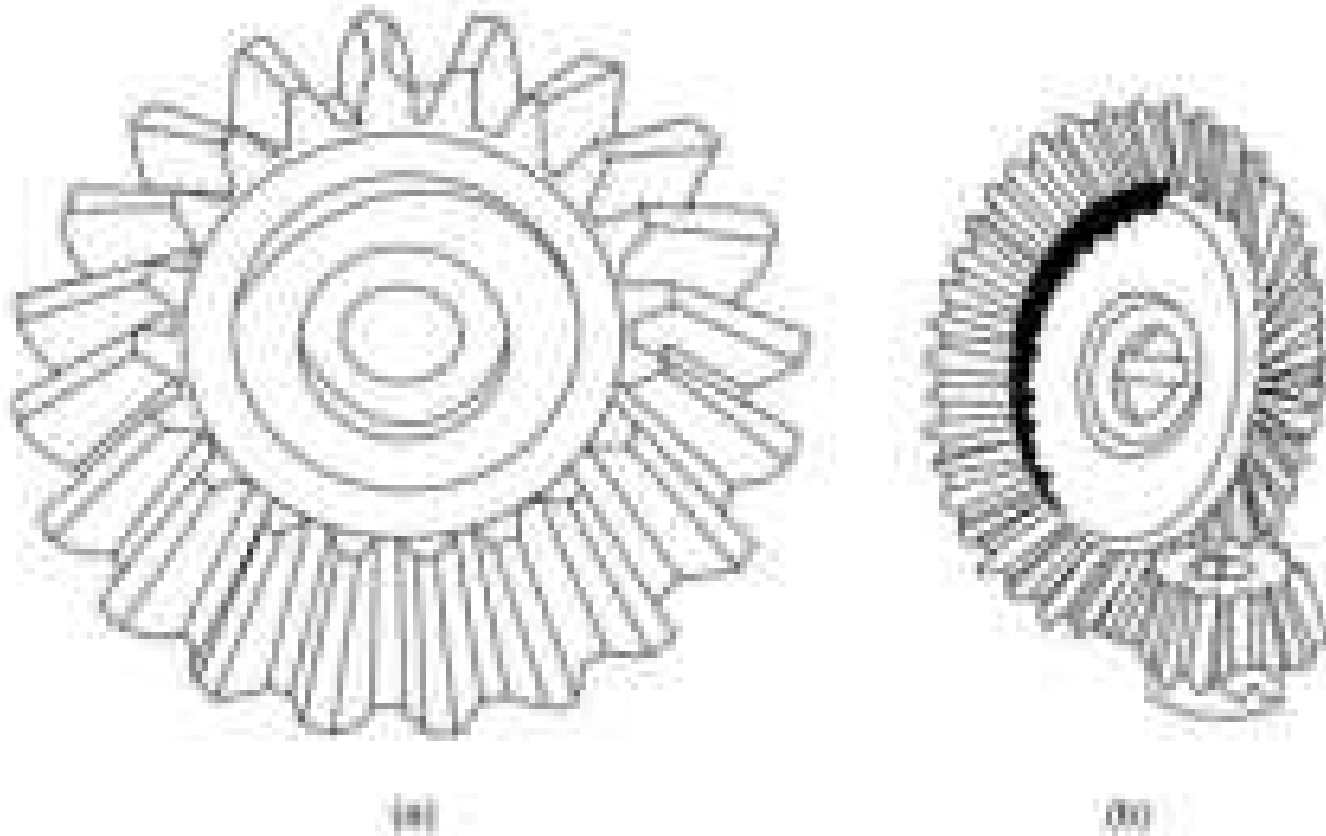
(a) Bevel gear (b) Bevel gear pair
